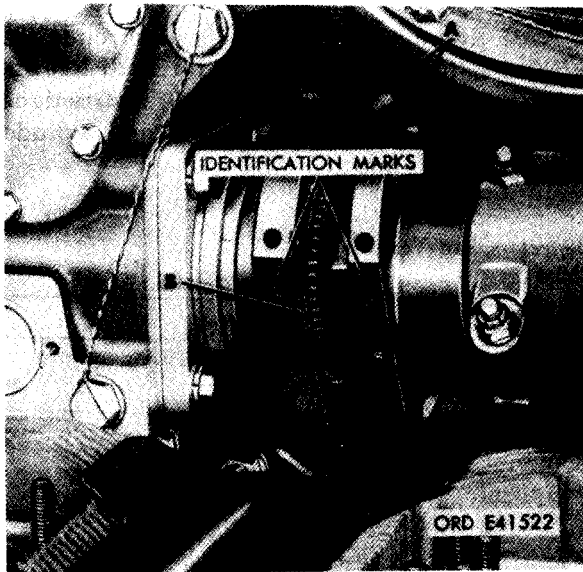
Positioning injection pump coupler by turning flywheel using splined wrench-5120-793-7895.
